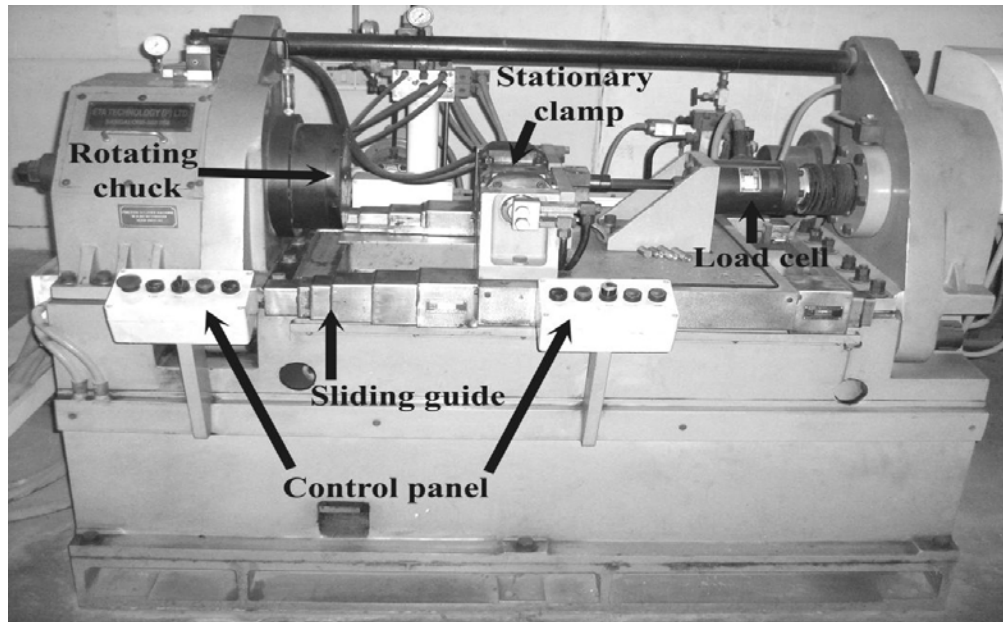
Photograph of continuous drive friction welding machine.
